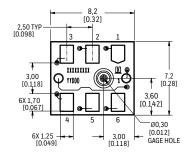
Leadless SMT Package Dimensional Drawings (For Reference Only: mm [in].)
